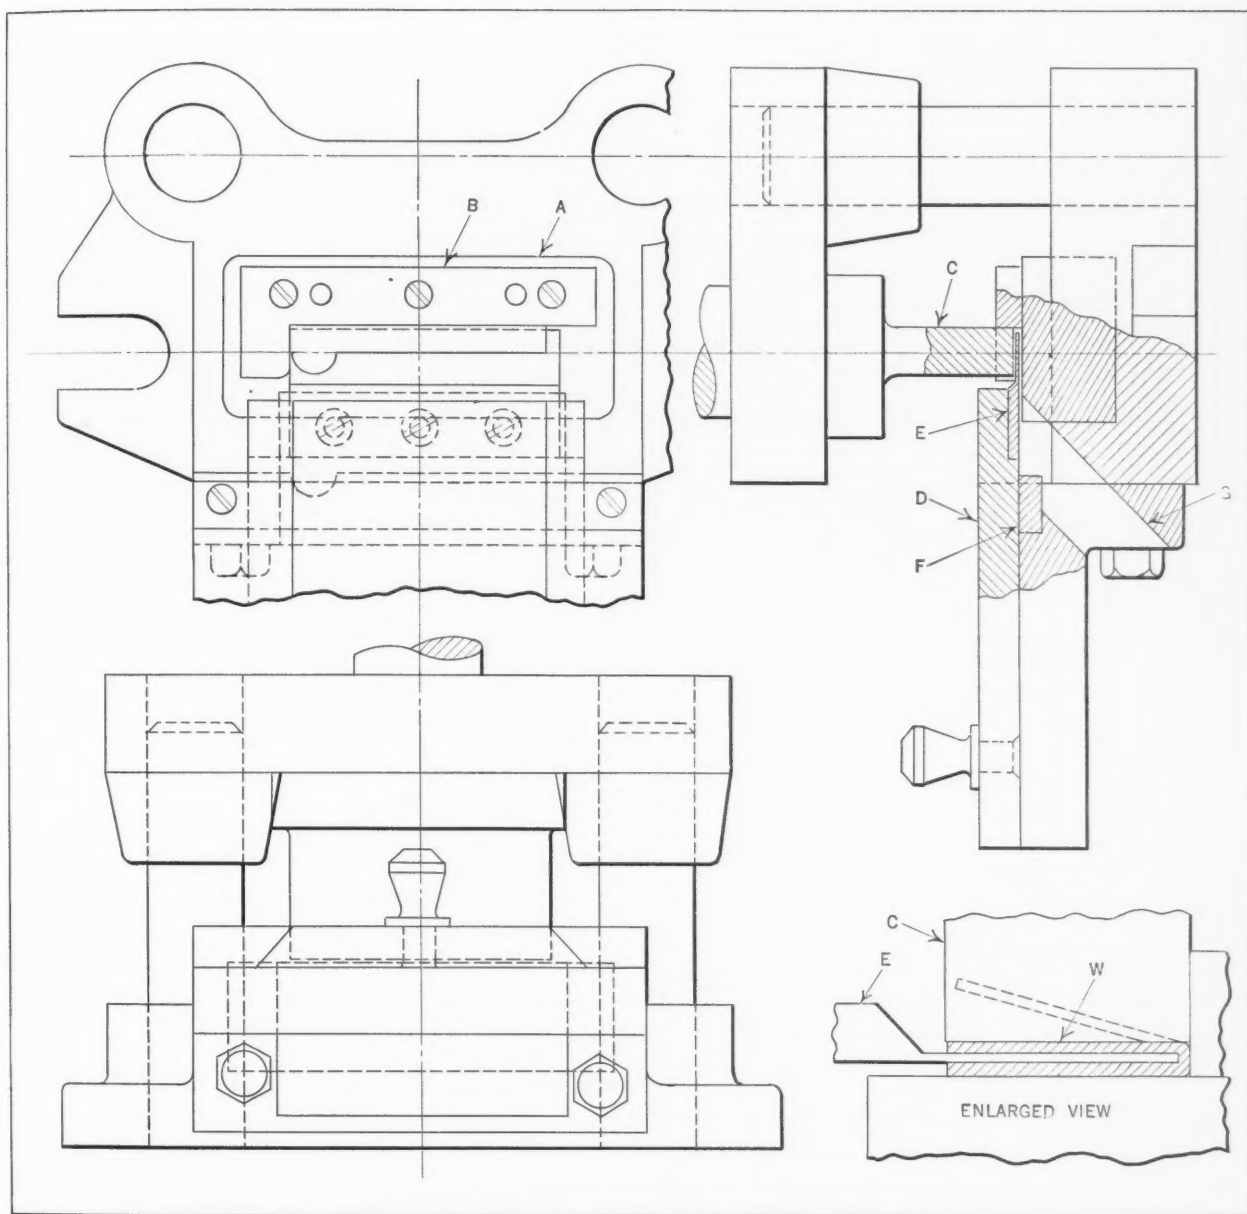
Flattening Die which Completes the Forming of the Channel W
